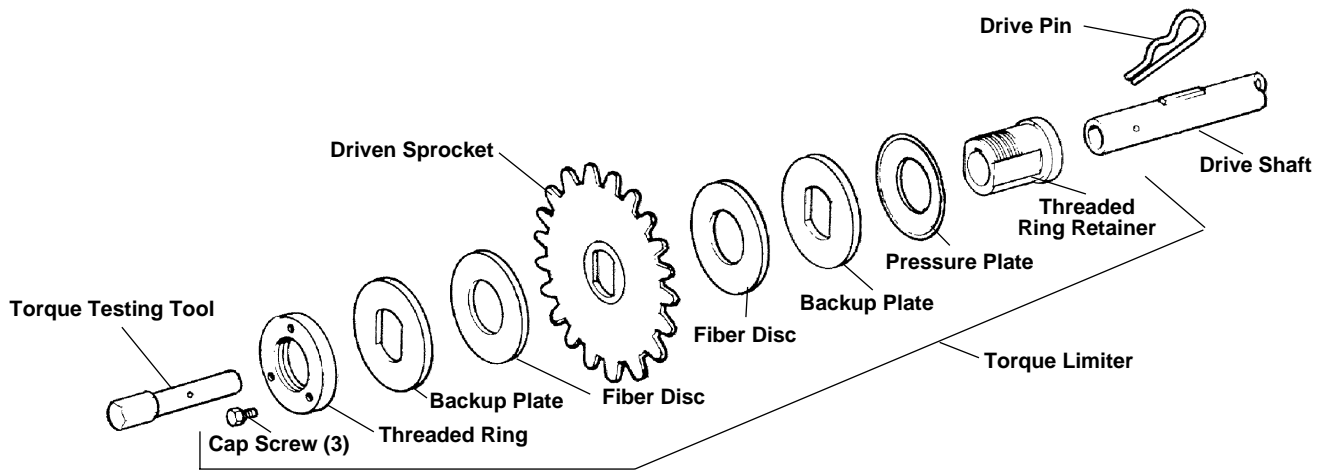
Torque Limiter, Torque Testing Tool, Driven Sprocket and Drive Shaft
